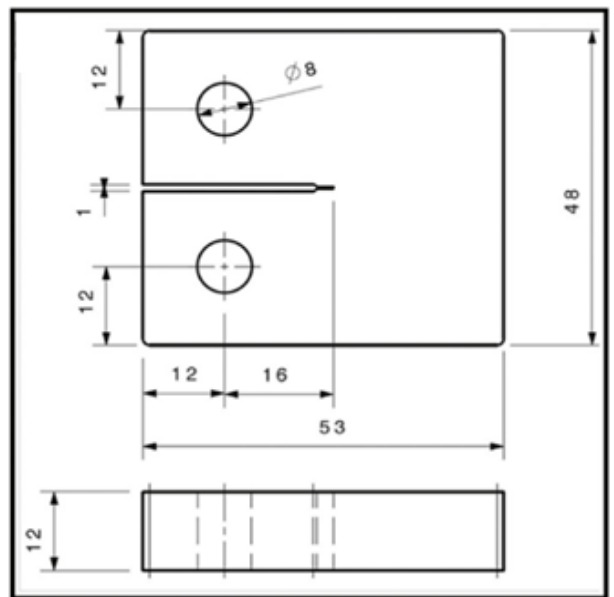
Dimensions of crack test sample according to ASTM D5405[21].
